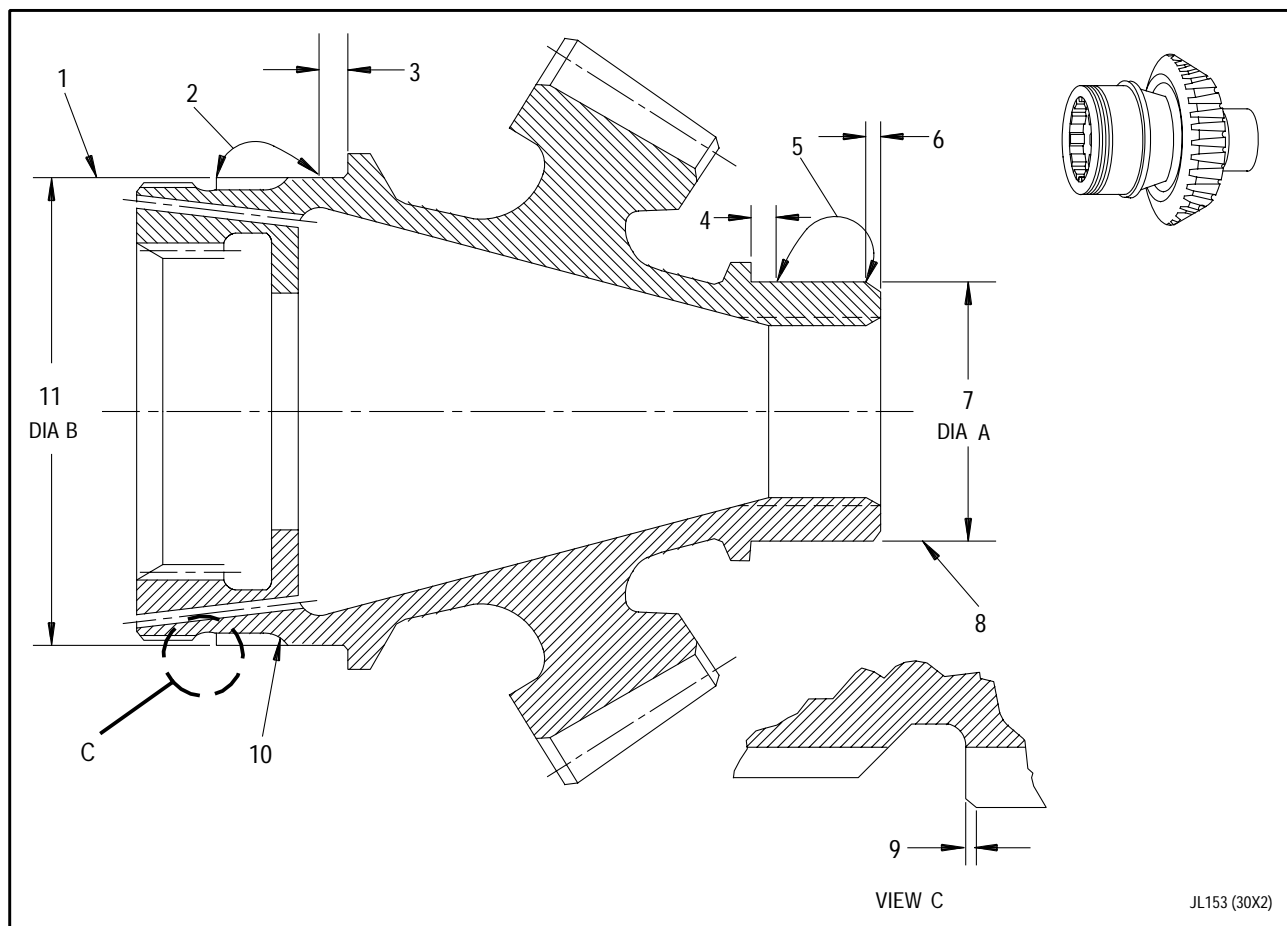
Gearbox Bevel Gearshaft - Plating Repair
